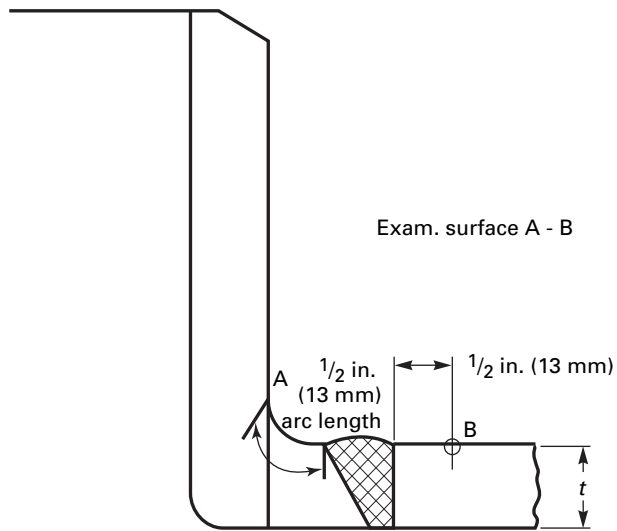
NOZZLE-TO-VESSEL WELDS
